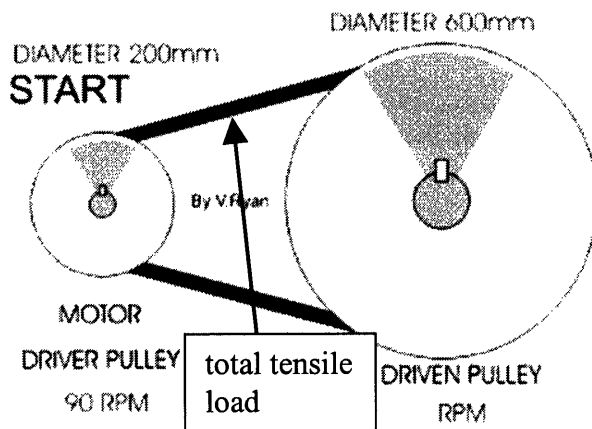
Example of a belt drive system (technologystudent.com/gears1/pulley3.htm, accessed 8/10/05).
